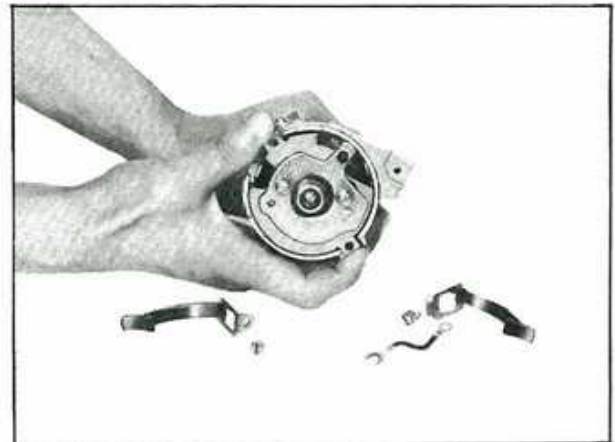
Disassembly of Contact Breaker Breaker Plate
